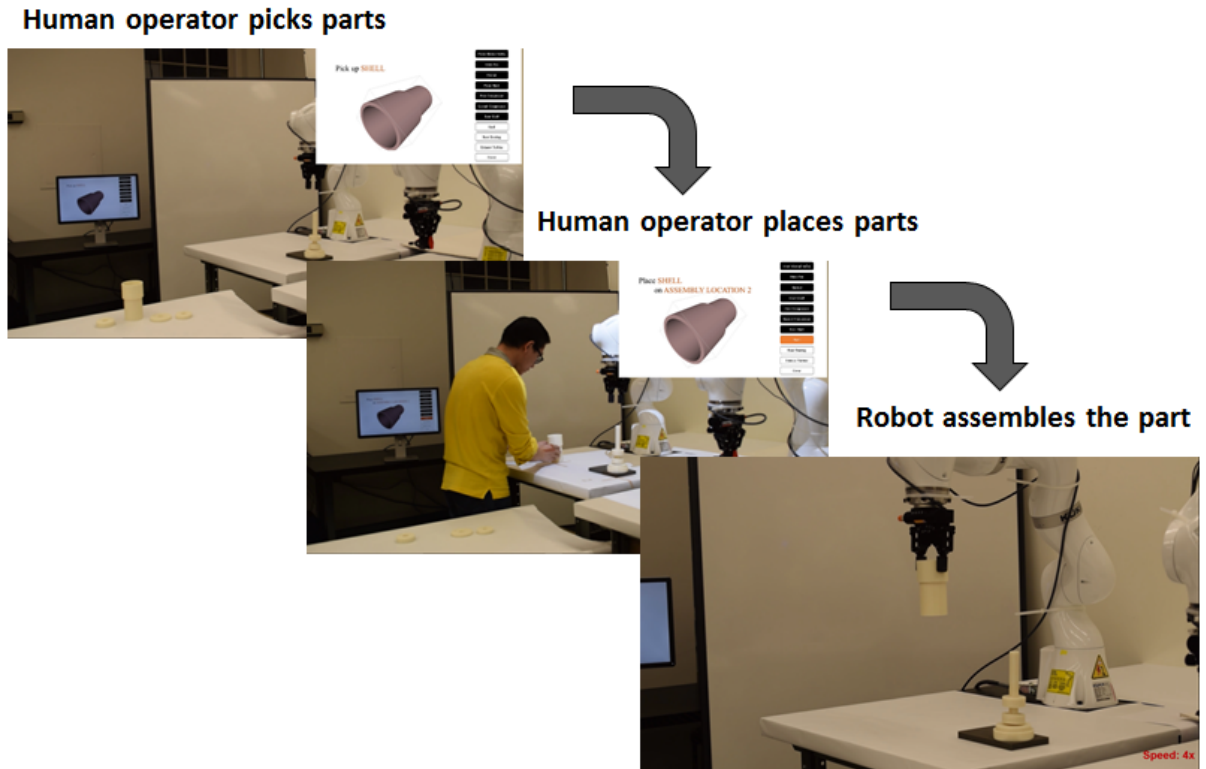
Assembly cell configuration (Human operator picks and places parts and robot assembles the parts).
